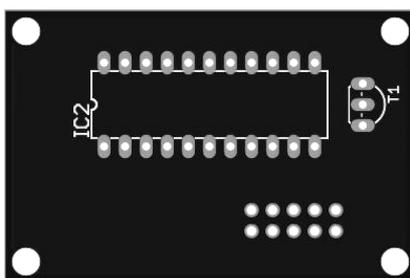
Interior view of the PCB board within Merlin on which the ccd sensor is placed on a two-layer socket strips1 (ST1).
